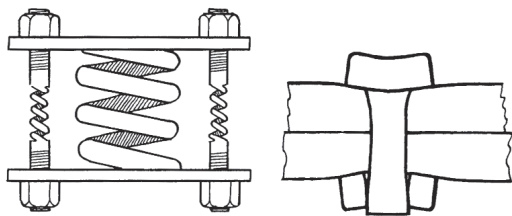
Illustration of distortions developed by clamping. Components represented by heavy spring during bolting being compressed by a group of small springs (bolts). Distortion of the solid spring (components) is shown greatly exaggerated on the right. Source: Bickford 1990
